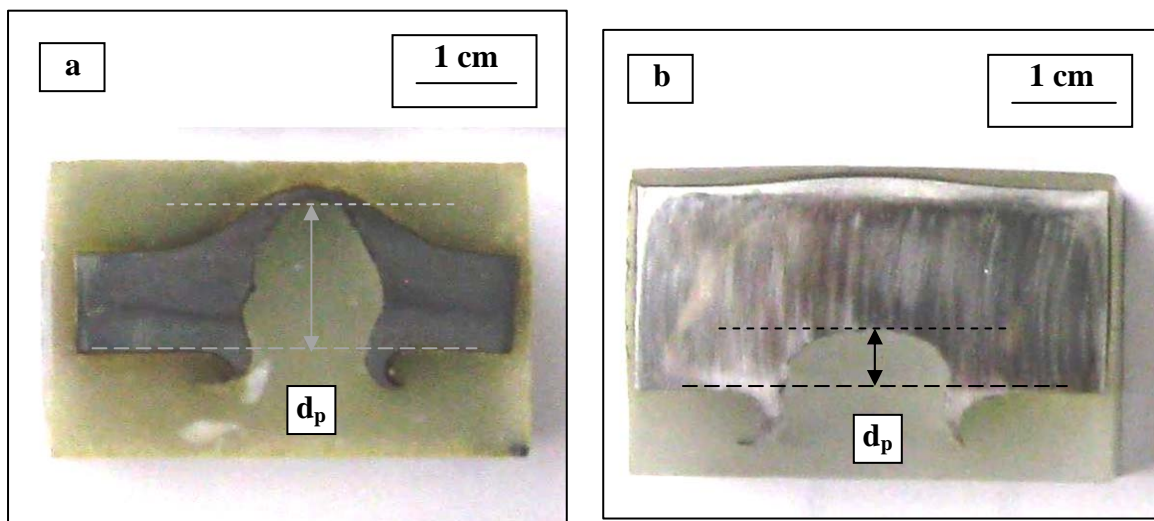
Cross section of a typical crater formed in (a) 9.5 mm and (b) 19.1 mm thick mild steel plates with a schematic of how the depth of penetration,  $d_p$ , was measured
